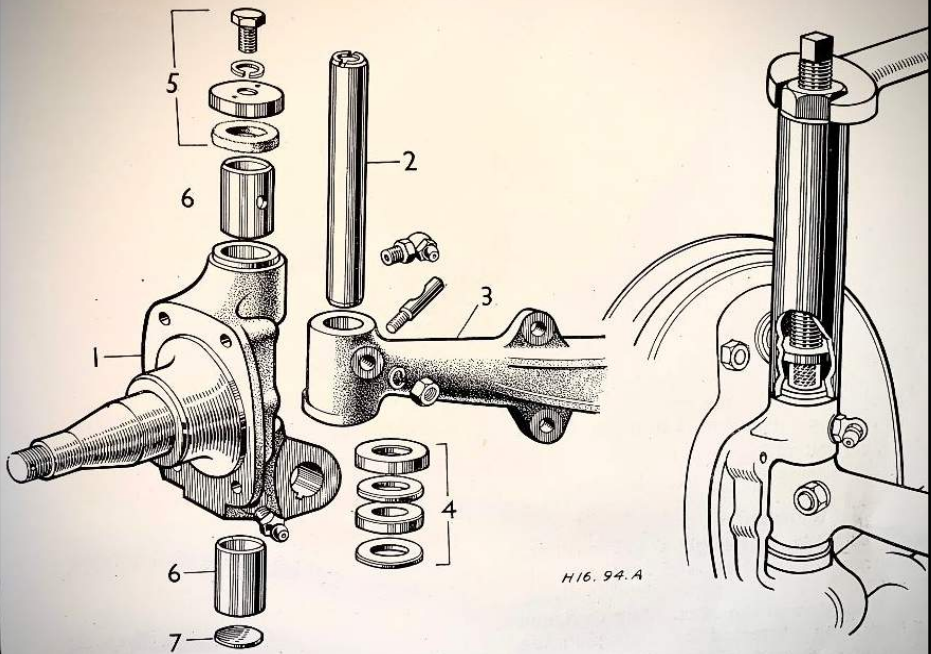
An exploded view of the swivel axle on the left showing : 1, swivel axle ; 2, swivel pin ; 3, front axle ; 4, the lower thrust assembly ; 5, the set screw and felt-washer assembly. 6, the swivel pin bushes ; 7, the welch plug. The illustration on the right shows the method of extracting a swivel pin. If the brakes are still in position, remove the brake drum and screw in the adjuster to clear the swivel pin.
